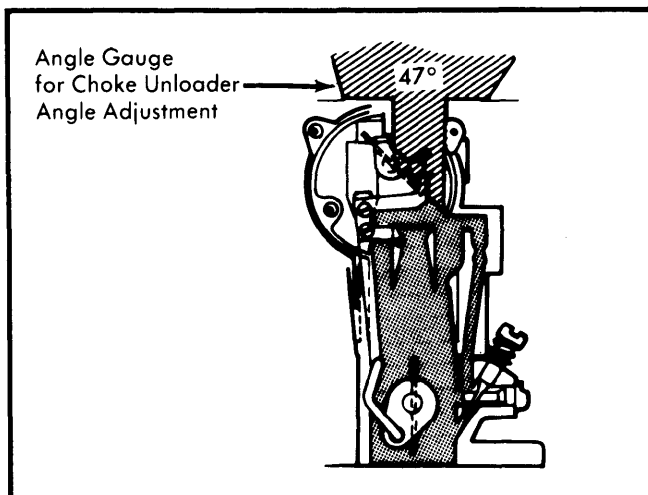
Adjusting Choke Unloader Angle with Gauge
